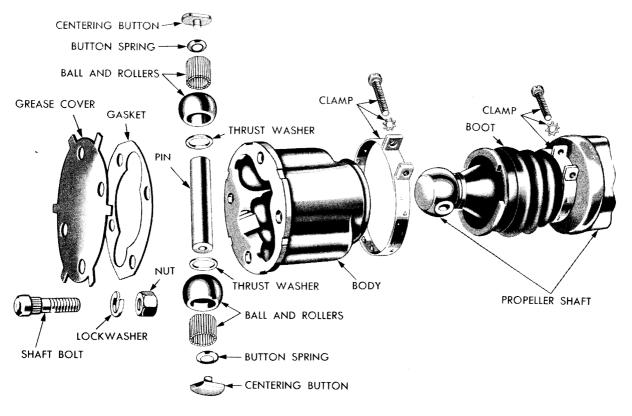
Front Universal Joint—Ball and Trunnion Type (Disassembled View)
